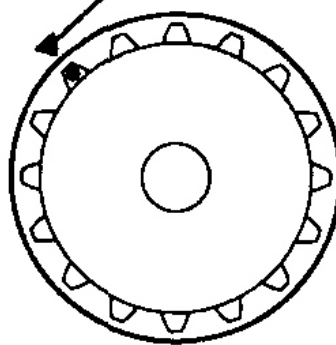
Installing Counter Balance Shaft Sprocket Onto Right Counter Balance Shaft
